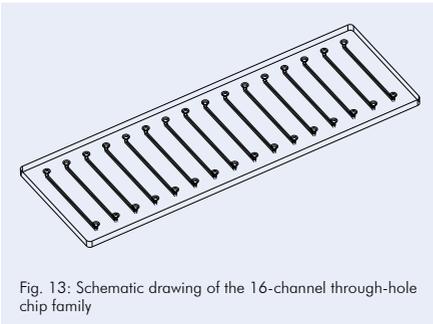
Schematic drawing of the 16-channel through-hole chip family
